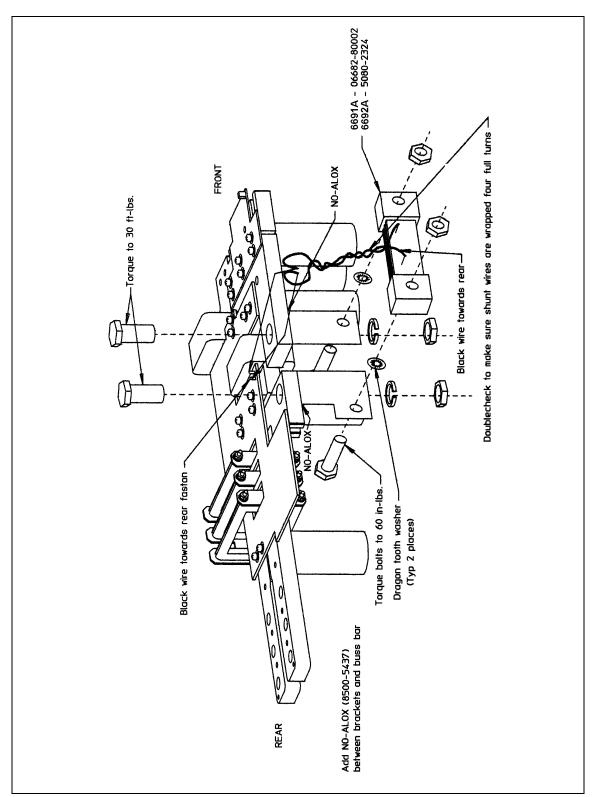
Assembly A10, Exploded View (6691A, 6692A)
